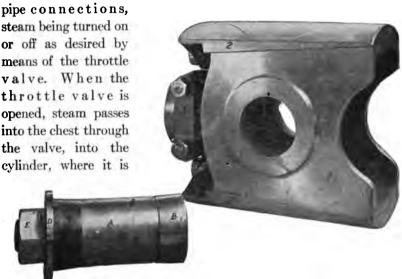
Typical Crosshead and Pin for Large Size Engine
